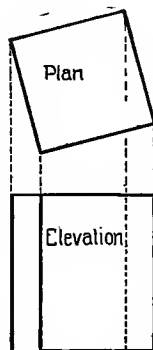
Mechanical Drawing of Fig. 49 in Position of Fig. 52
